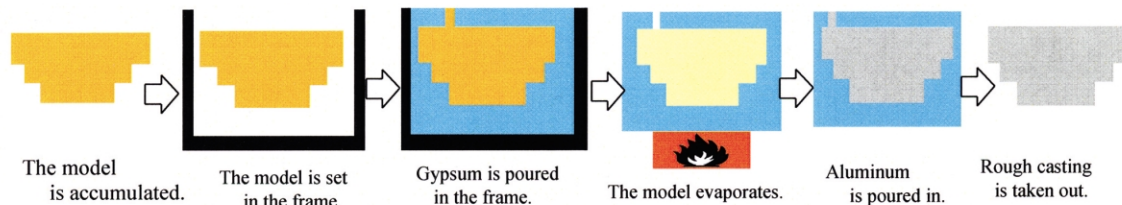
RP Lost - form Casting using a Laminated Mold Model
